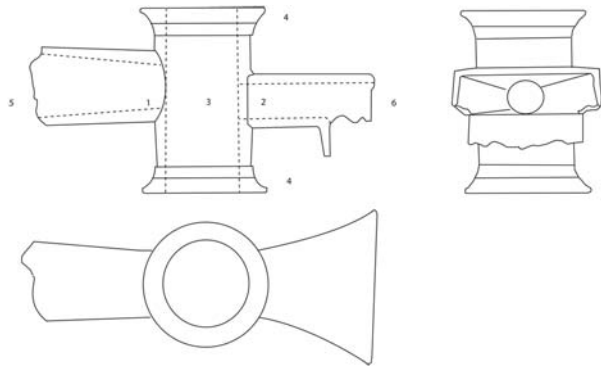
Housing of a tap found at Bertbelming (France): 1 inlet opening; 2 outlet opening; 3 cylinder housing; 4 solid rings; 5 inlet; 6 spout (after Drack 1997, Fig. 12).
